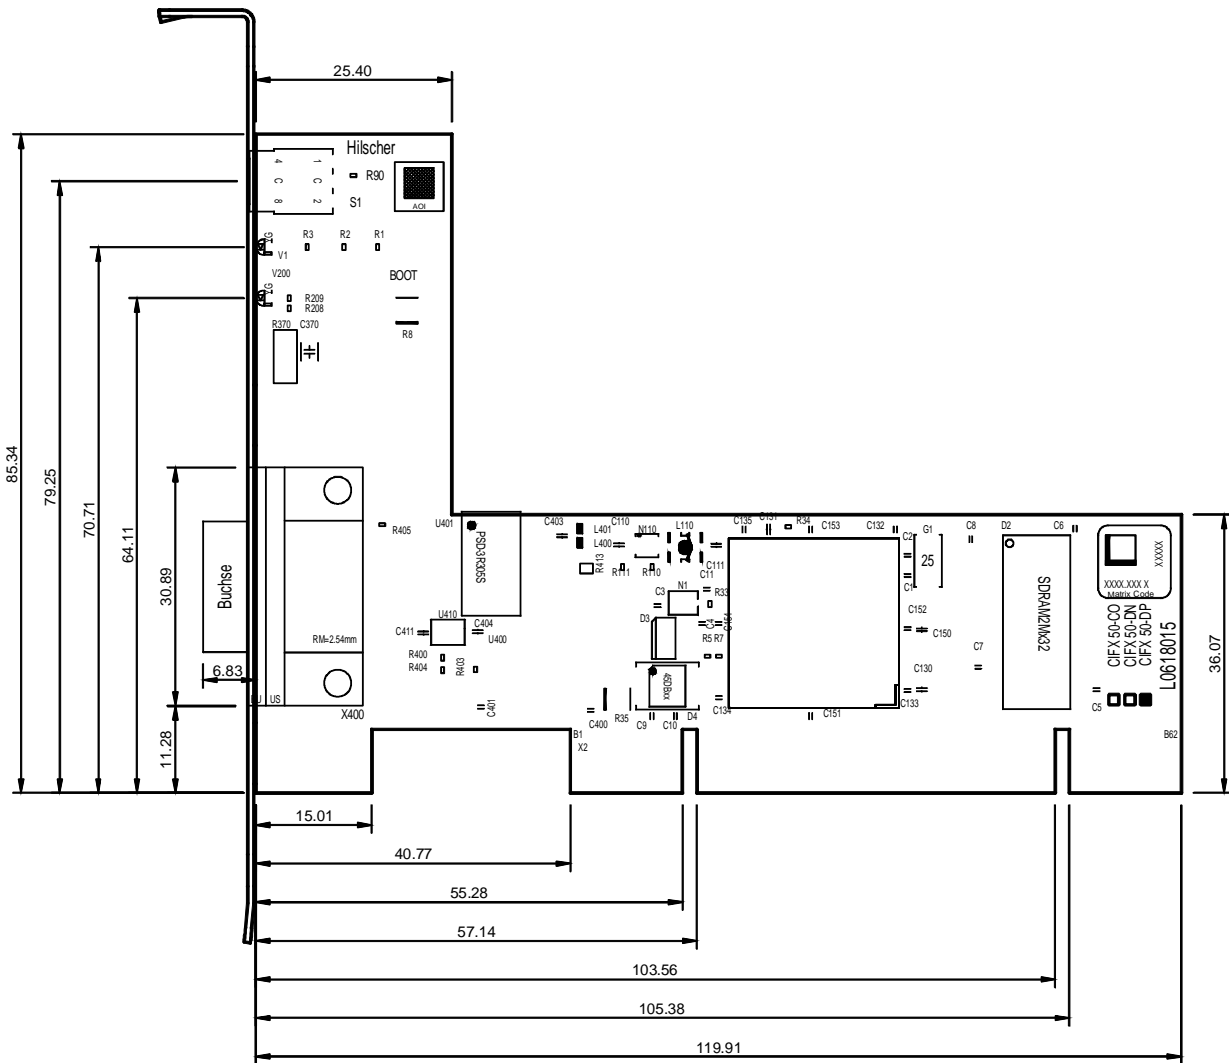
Dimensions CIFX 50-DP (Hardware Rev.5)
